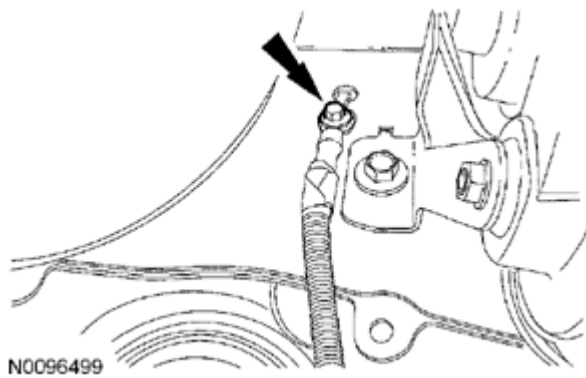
Locating Electronic Power Assist Steering Wiring Ground Wire Bolt
